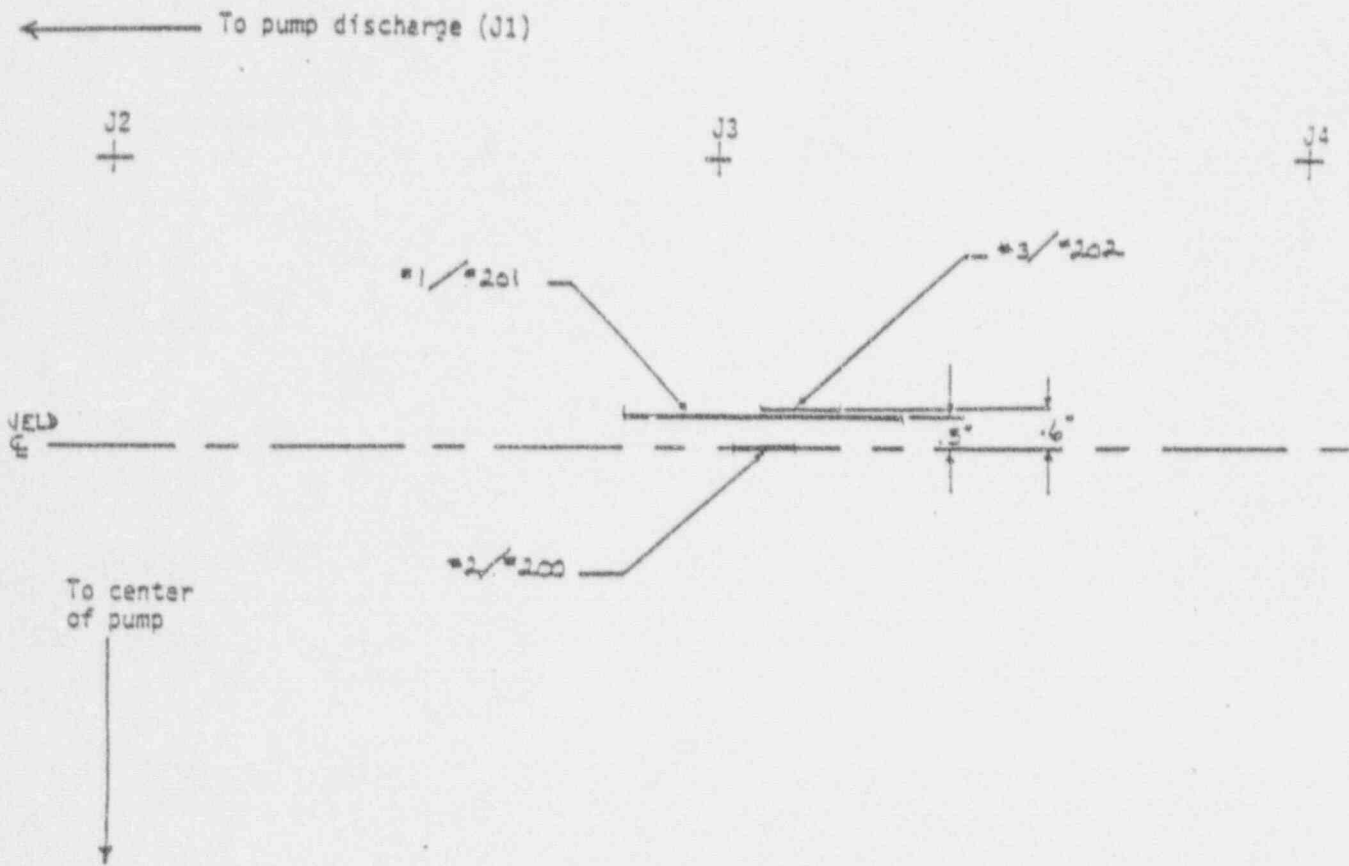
ANO-1 1988 UT Exam of "B" RCP Upper Scroll Weld Indication - Plan View
